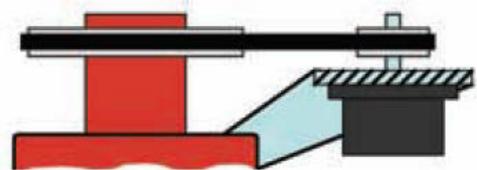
A shafted encoder can also be mounted to a driven shaft using a belt and gears
